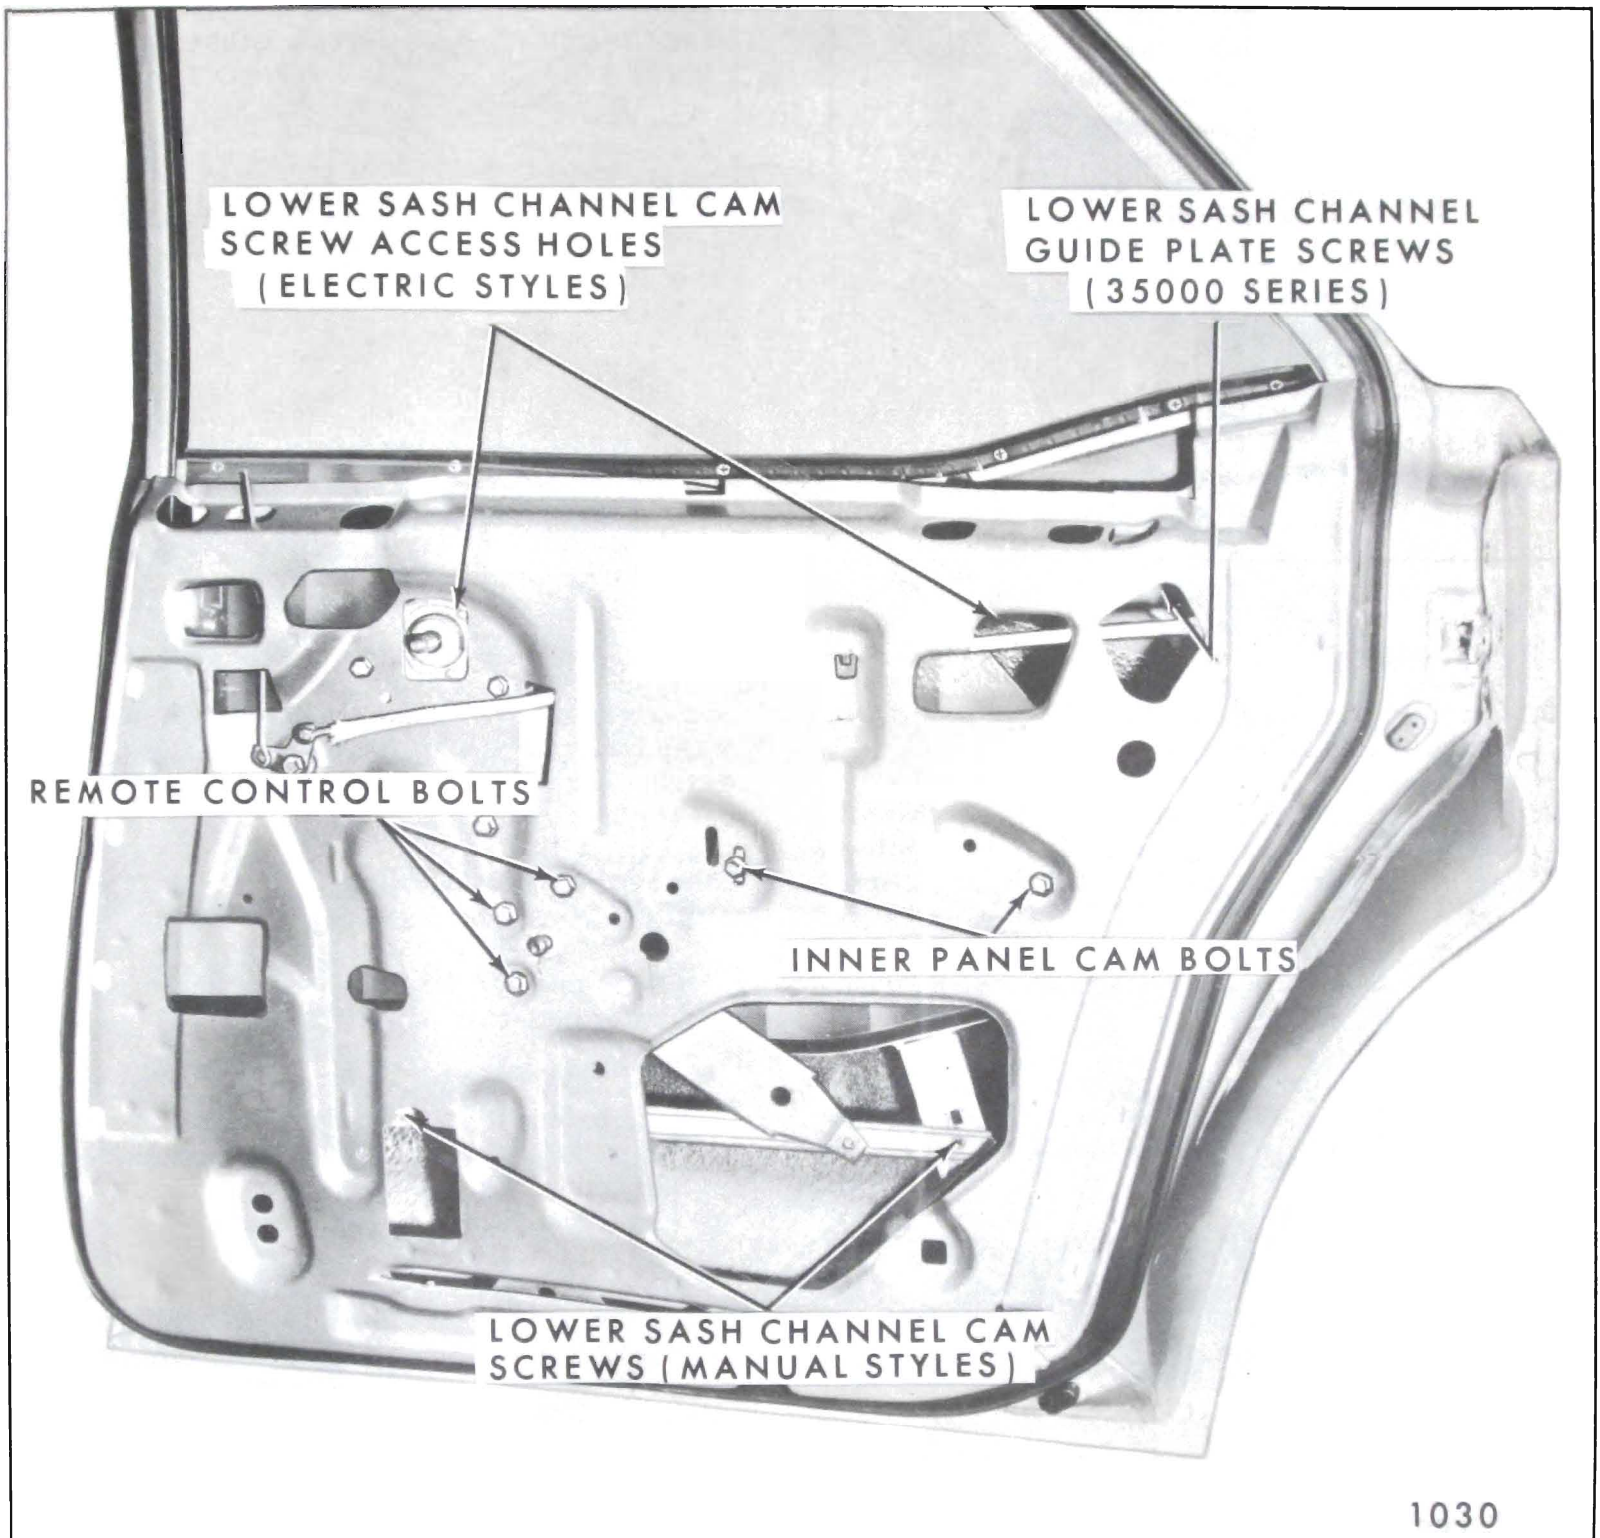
Rear Door Hardware Attachment - "B" Styles Shown - "A" Styles Similar
